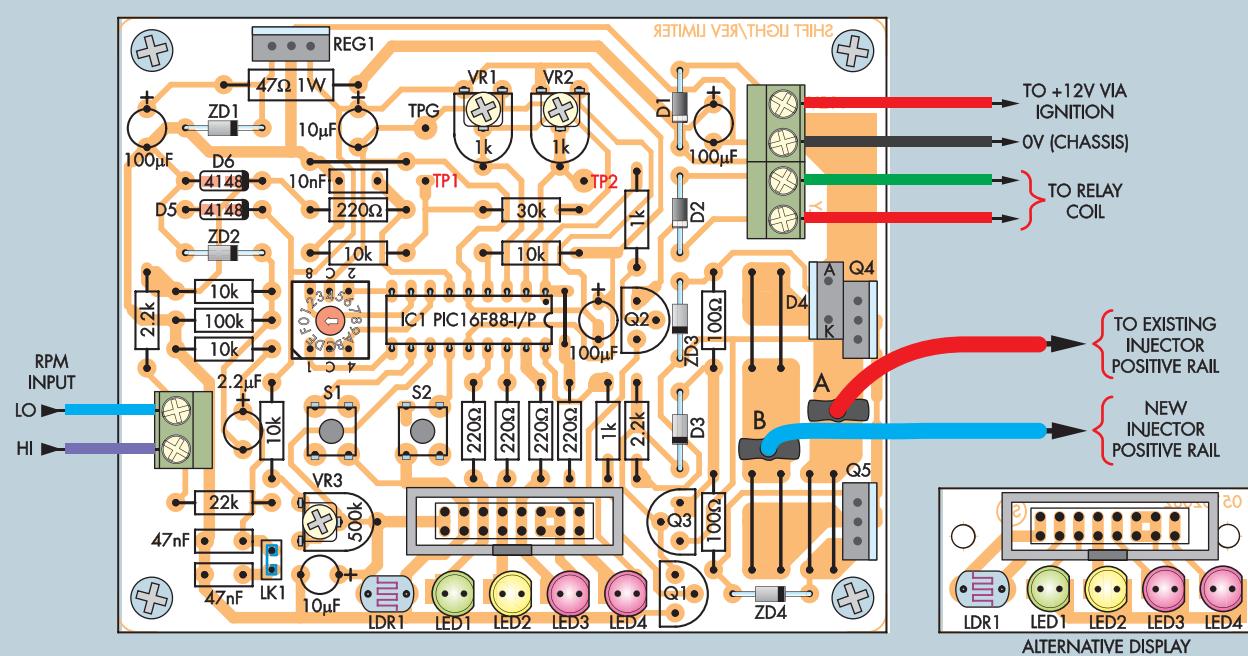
install the parts on the PC board as shown on this component layout diagram. You can either mount LED1 to LED4 and the LDR on the main board as shown, or you can mount these parts on a separate display PC board (shown at bottom right). The two boards are connected together via a 16-way ribbon cable fitted with IDC line plugs.
